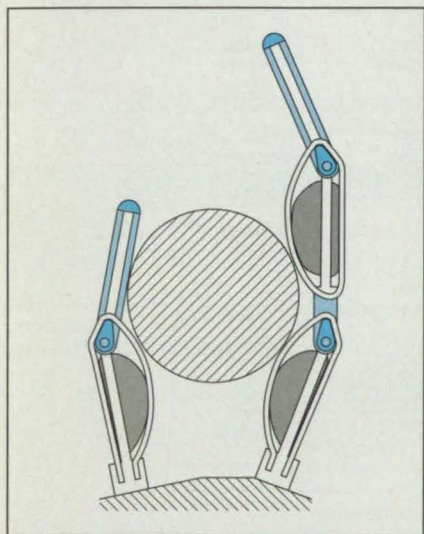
Bladder Joints in This Robotic Hand enable it to grasp a cylinder.
